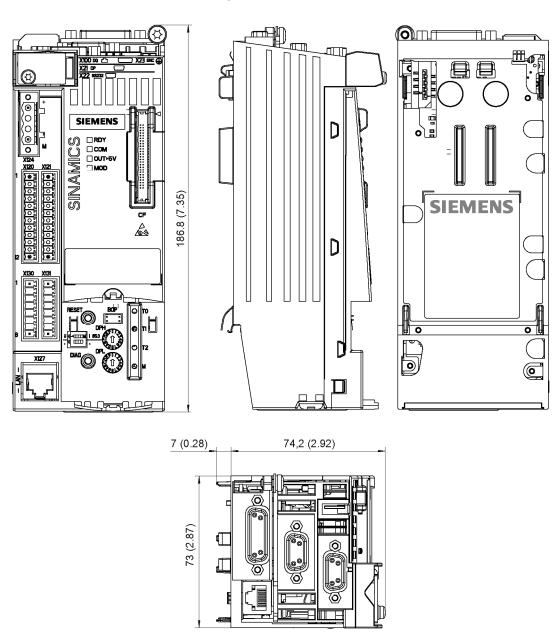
Dimension drawing, Control Unit CU310-2 DP, all data in mm (inches)
